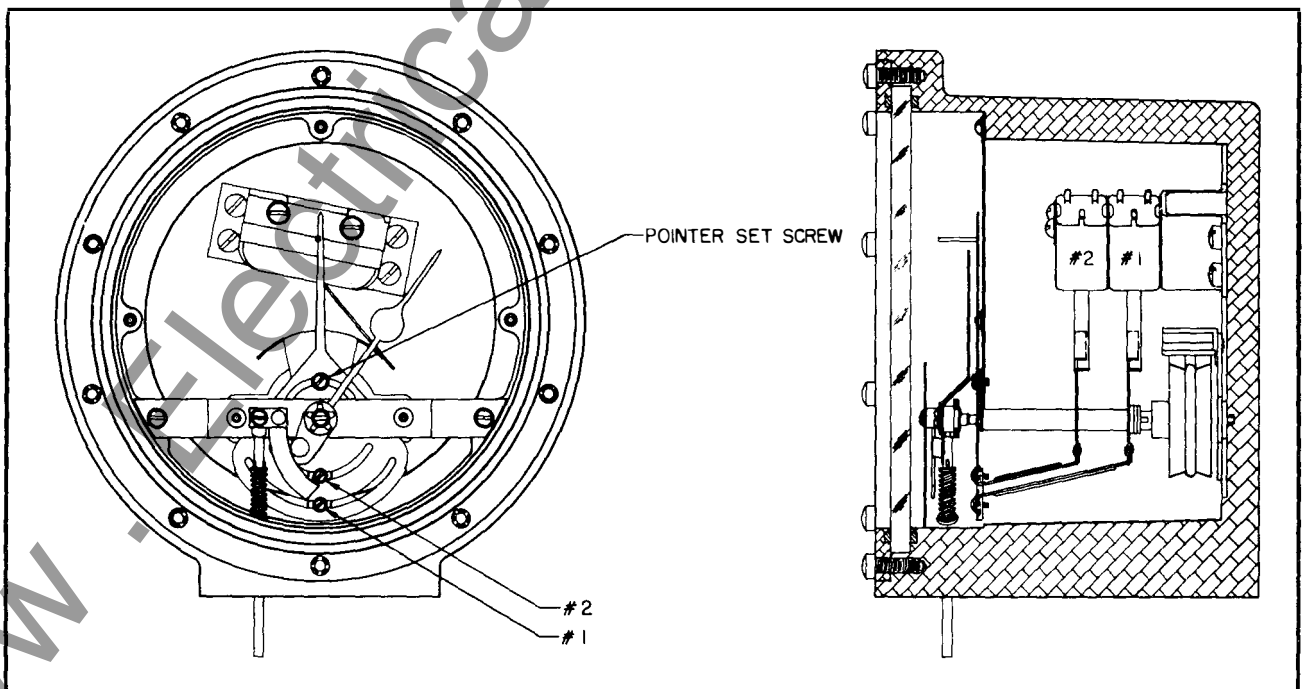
Sectional View with Cam Adjusting Locking Screws Exposed
